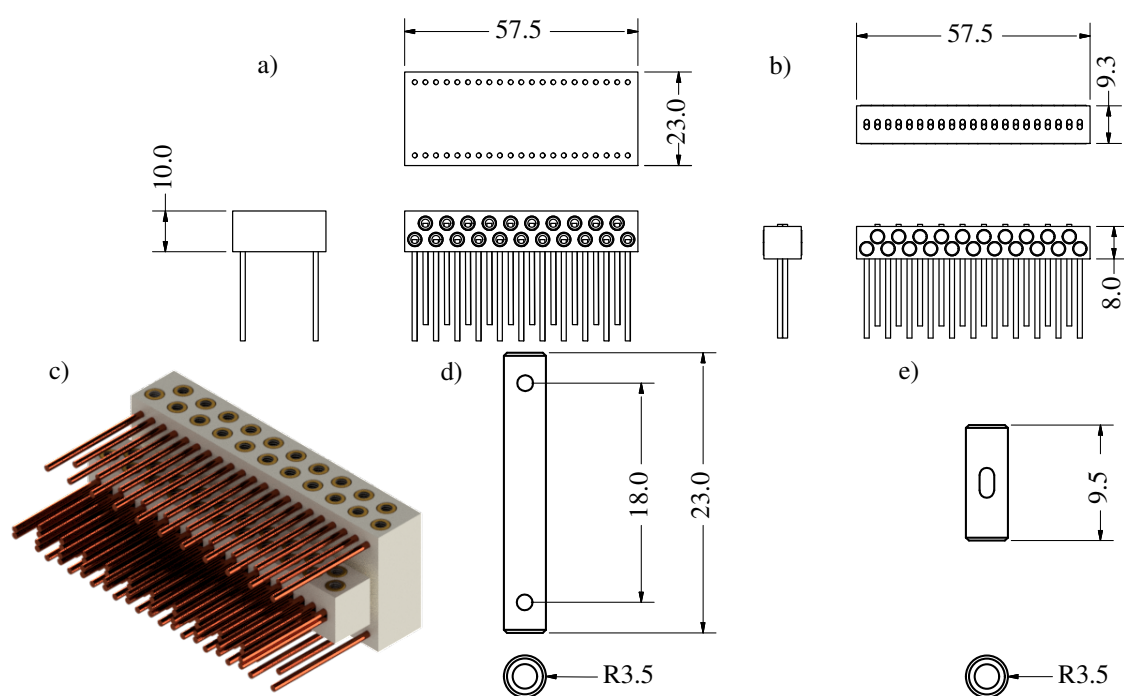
Drawing of the electrical connectors used to wire the decelerator coils. View a) shows an annotated drawing of the larger connector assembly. View b) shows an annotated drawing of the smaller inner connector. In both cases the wires have been included to show how the electrical connection is made. Both parts of the connector are constructed from 21 brass pins which sit in a PEEK block. The wires are then pushed to the brass pins and held in place with grub screws. A drawing of the complete connector assembly is shown in panel c). The drawings shown in d) and e) show the annotated brass pins for the larger and smaller connectors respectively. Original drawings by John Dyne.
